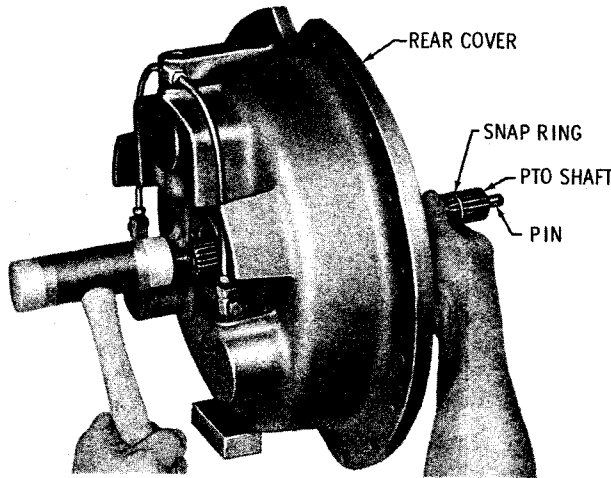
Removing PTO shaft from TTB model rear cover
